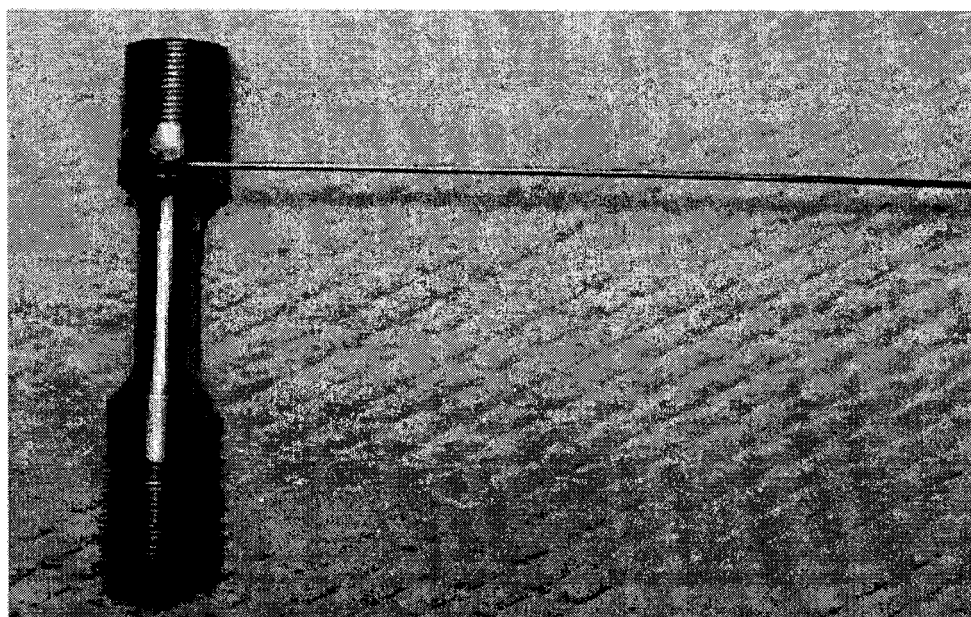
Spot-Welded Tensile Specimen
